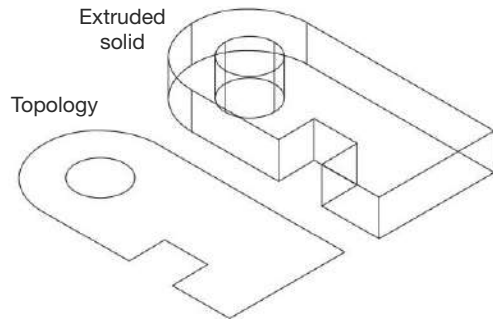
Component model produced using translational (linear) sweep (extrusion)
